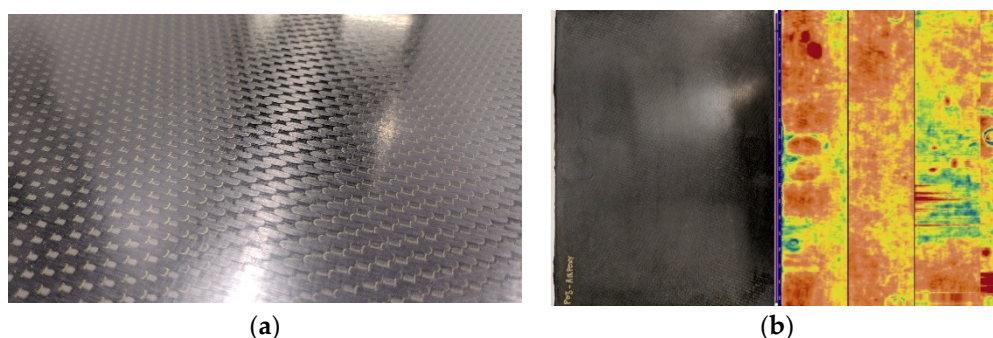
Preparation of AIR-3R test samples. (a) Visual inspection of the carbon fiber sheet manufactured inside the RTM molds. (b) Ultrasonic C-Scan inspection of the manufactured carbon fiber sheets prior to samples cutting.
